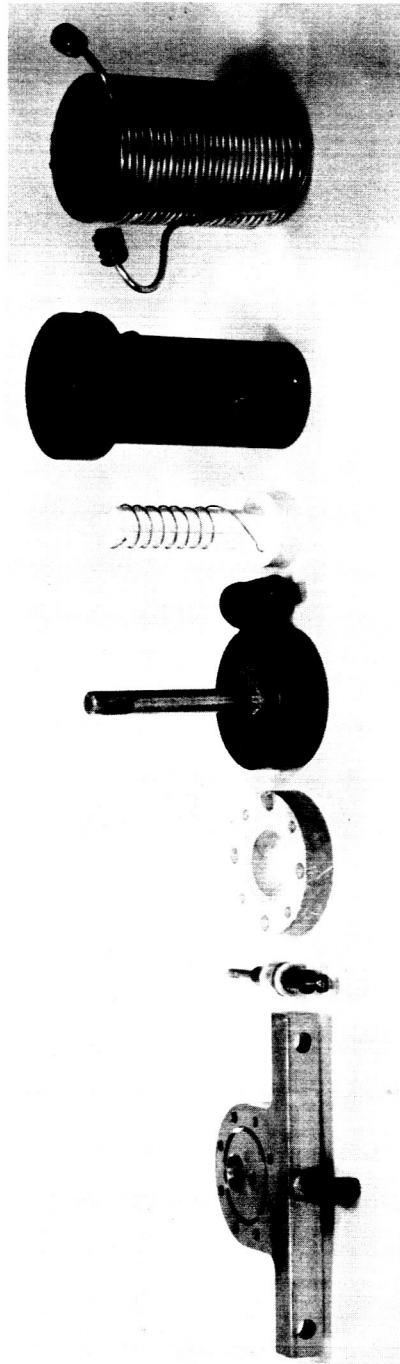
MARK II, MOD 2 THRUSTOR, DISASSEMBLED
